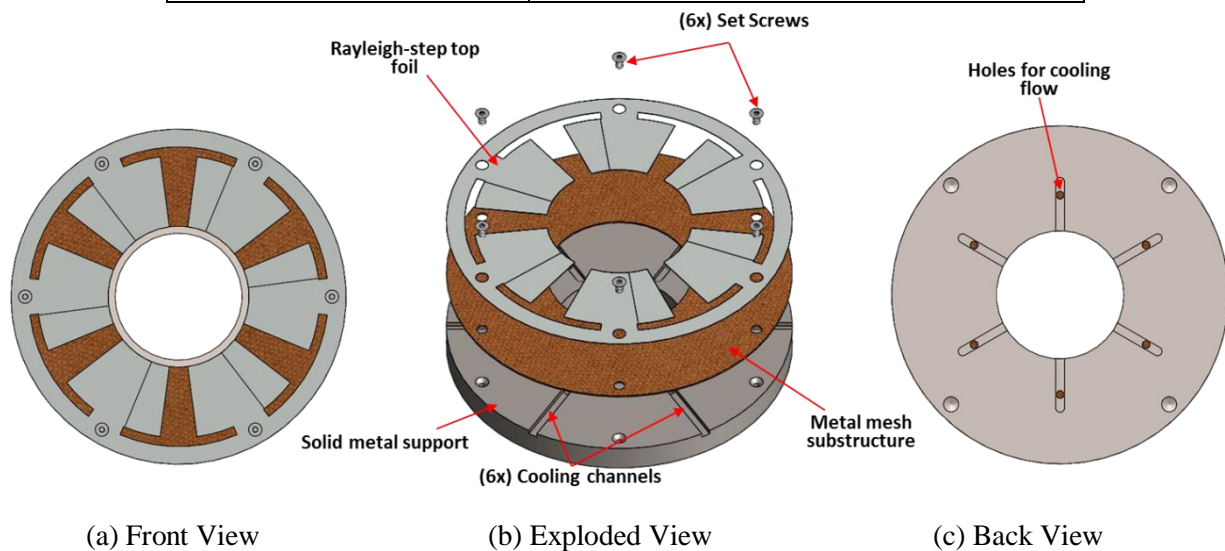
(a) Assembled front view (b) an exploded view and (c) assembled back view of a Rayleigh step metal mesh thrust foil bearing.
